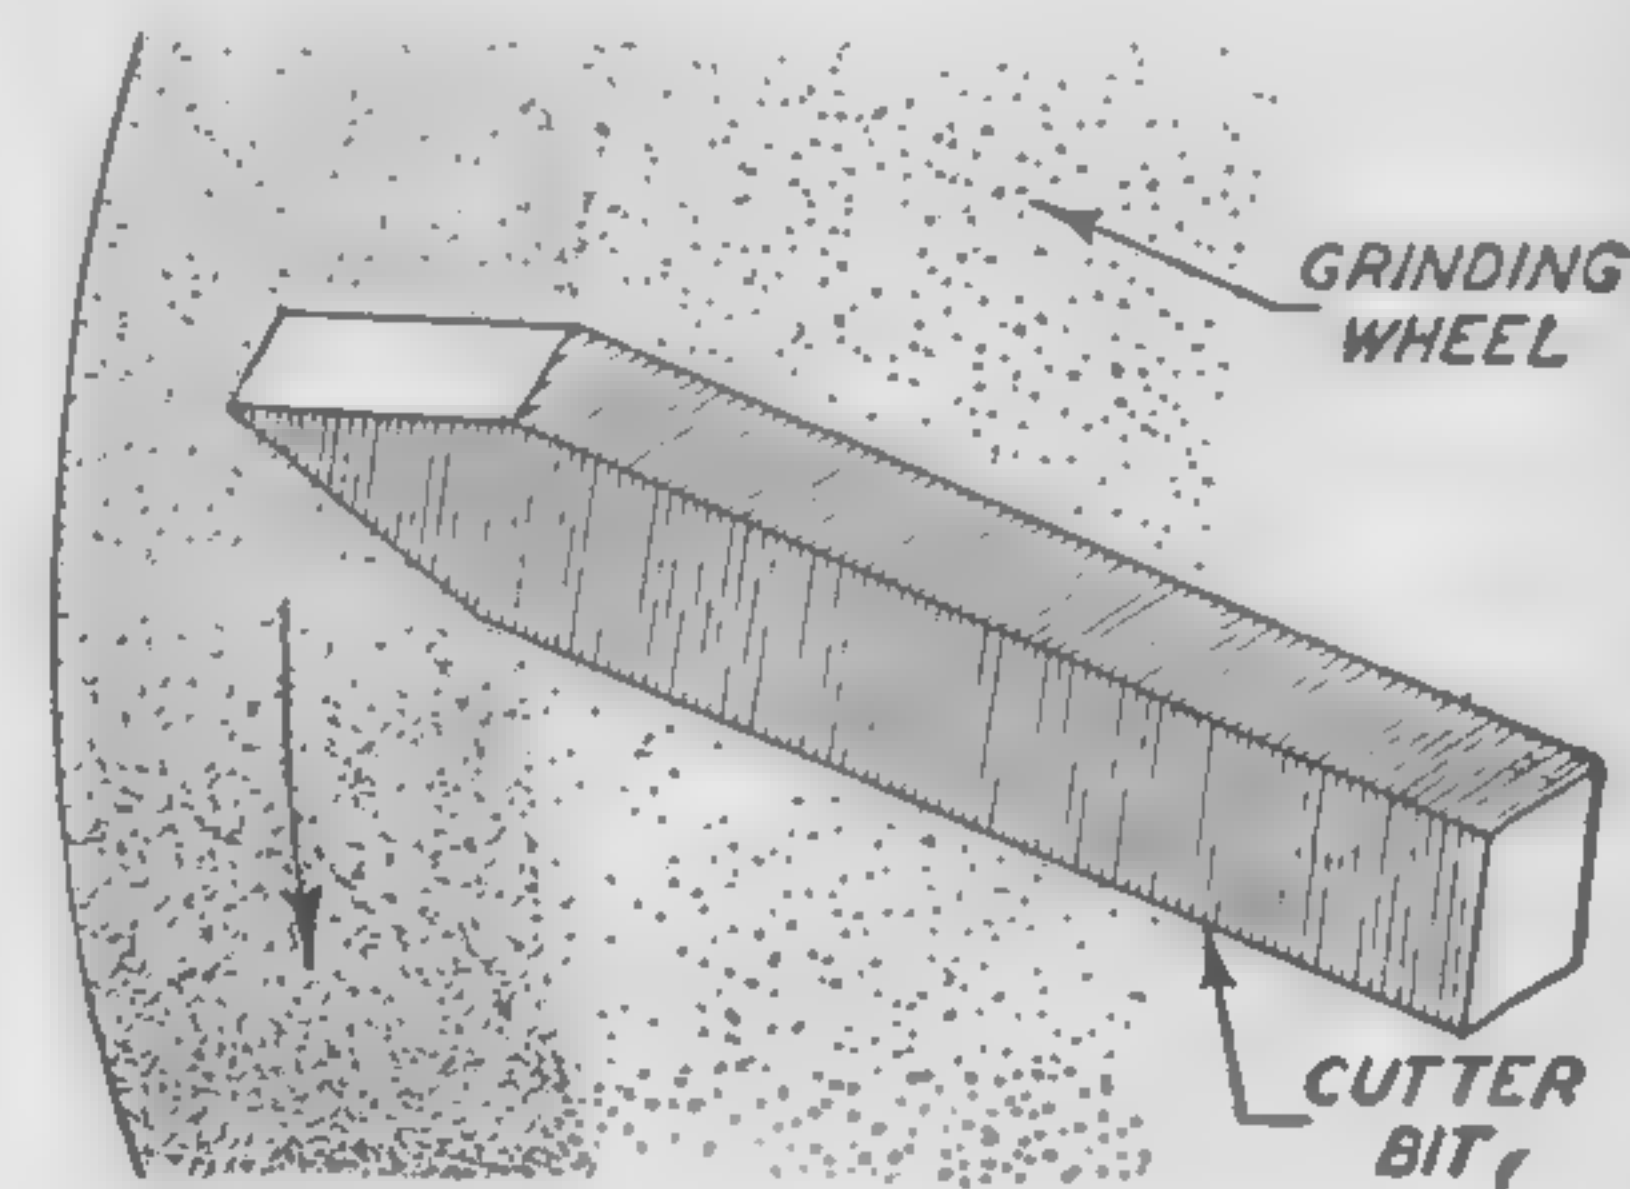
Step 5—Grinding the Lathe Tool for Top Rake
